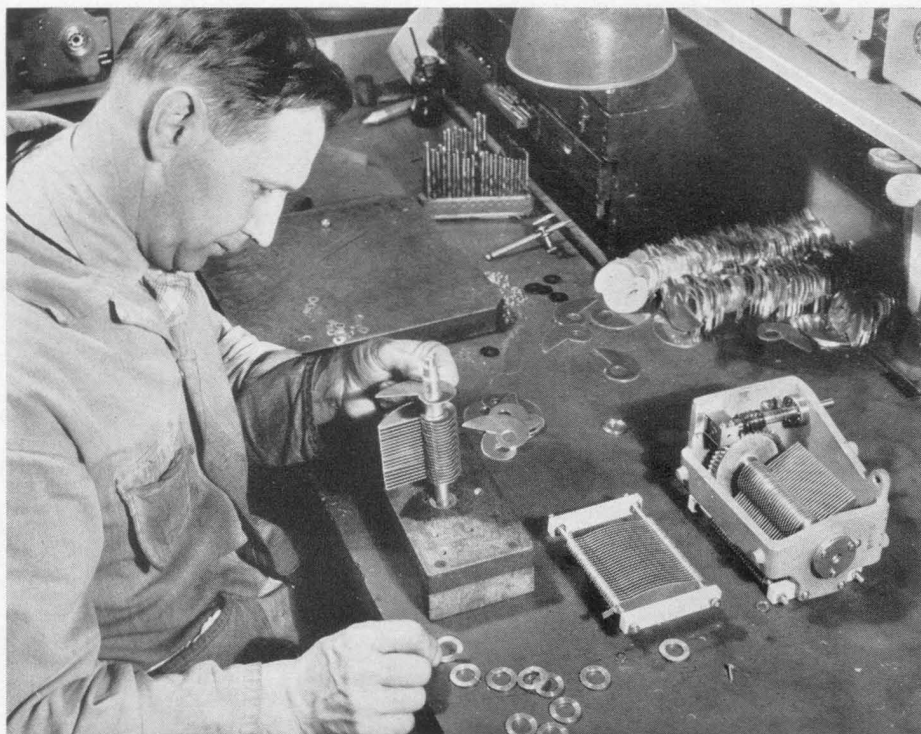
Assembling the rotor plates on the shaft. At the right may be seen a stator assembly and a completed condenser
